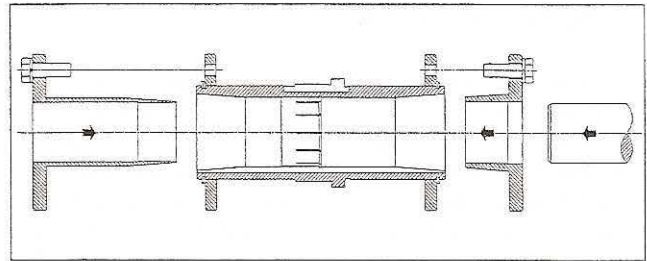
Short Shaft Bushing and Output Hub Assembly
